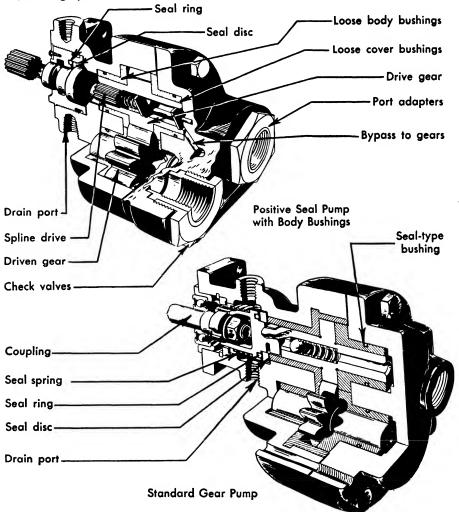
A cutaway view of an engine-operated hydraulic pressure pump. (Courtesy Pesco Products Company)
